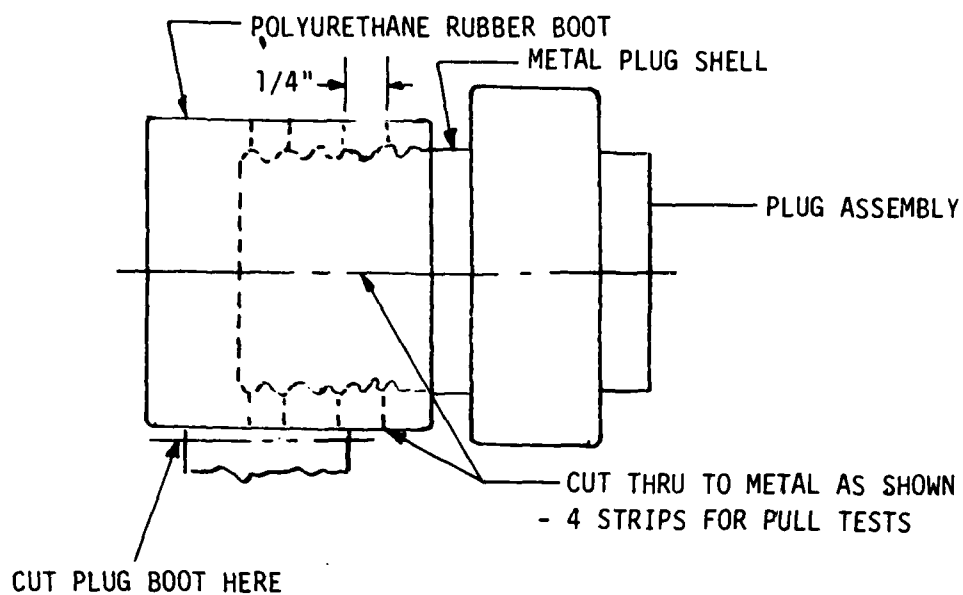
DESTRUCTIVE BOND TEST SET-UP PLUG BOOT-TO-SHELL
